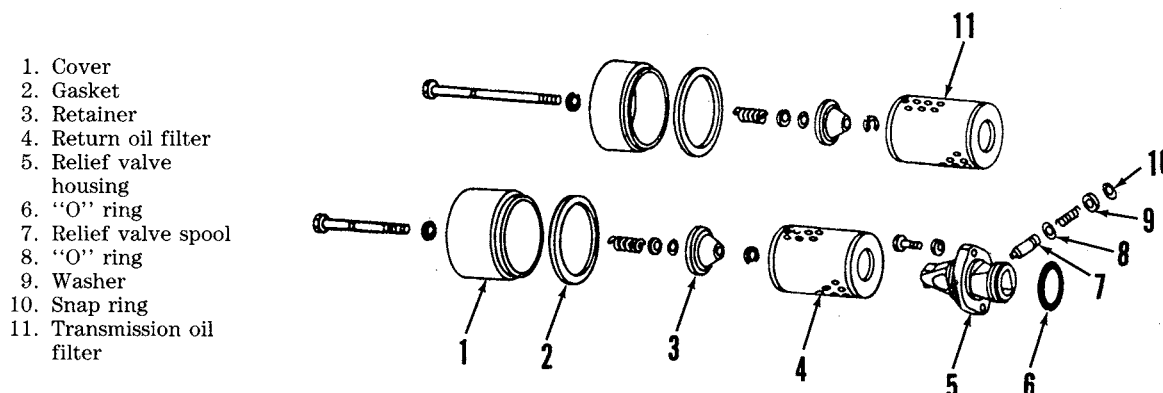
Exploded view of return oil filter relief valve used on Power Shift models.
